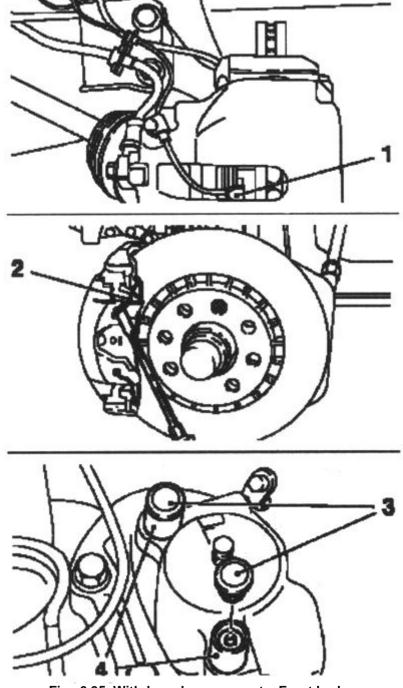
Withdrawal components Front brakes: 1 - sensor pads brake pads, 2 - retainer spring lever; 3 - dust caps;
